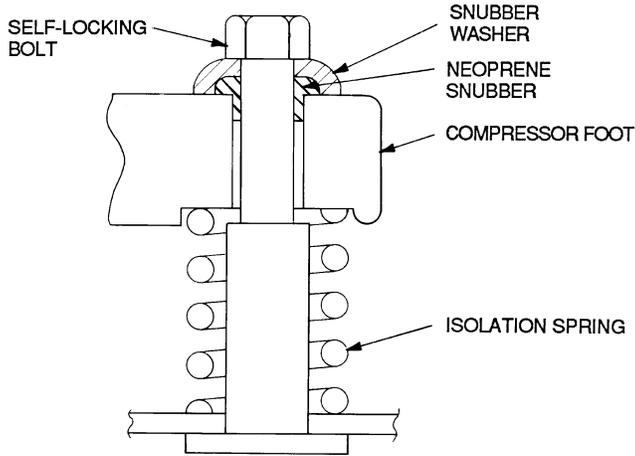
Typical Compressor Mounting (38AKS Units)
